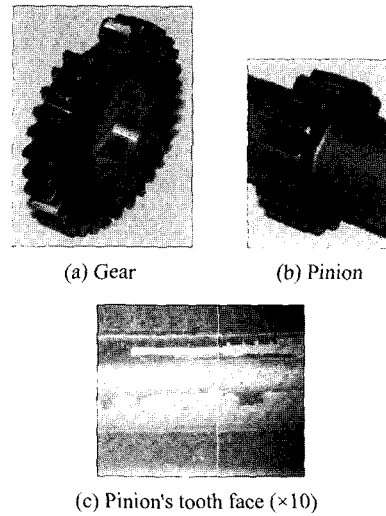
The surface of gear and pinion coated with C-N film after test.
